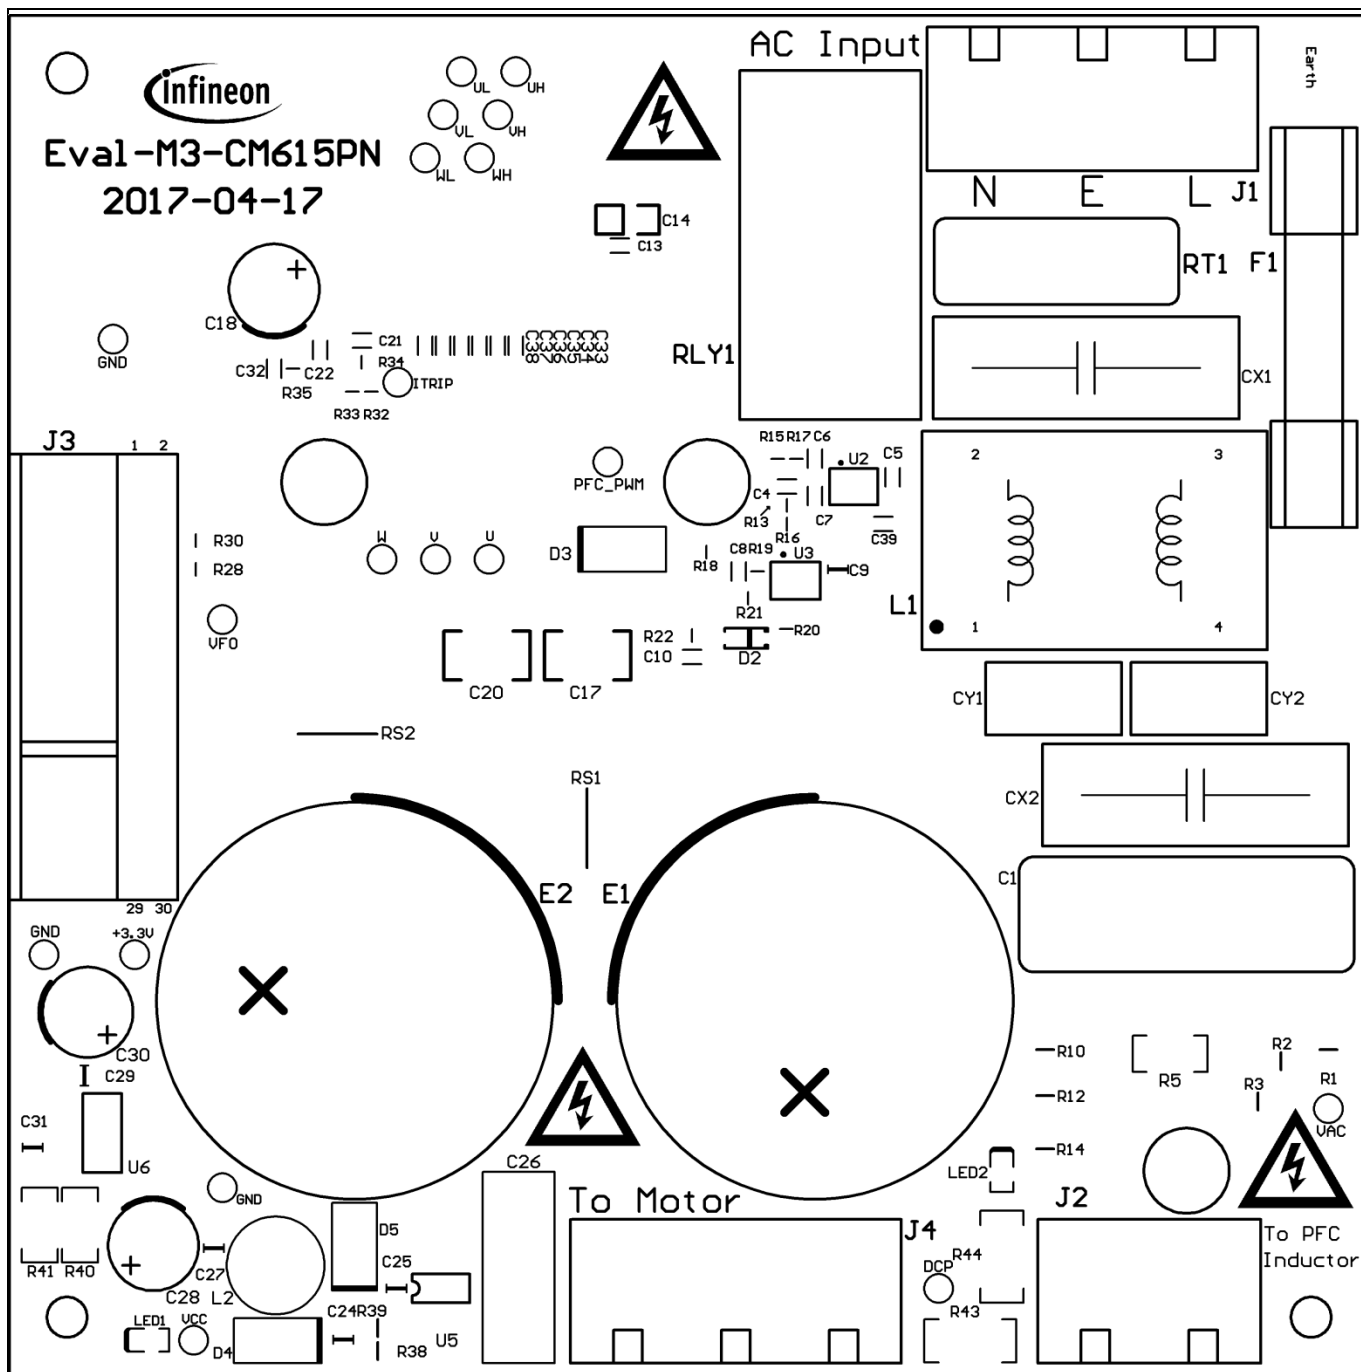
Top assembly print of the Eval-M3-CM615PN evaluation board
